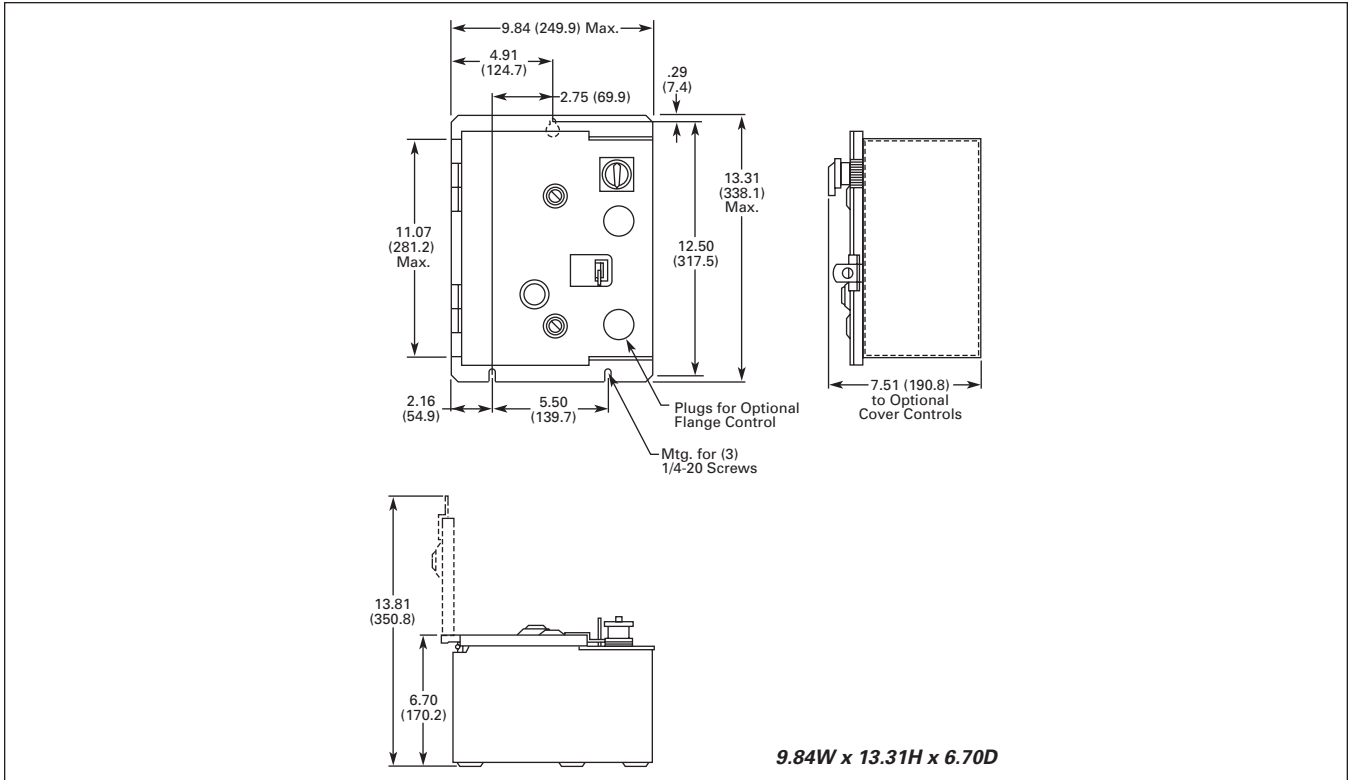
Box 5, Type 12 — Approximate Dimensions in Inches (mm)
